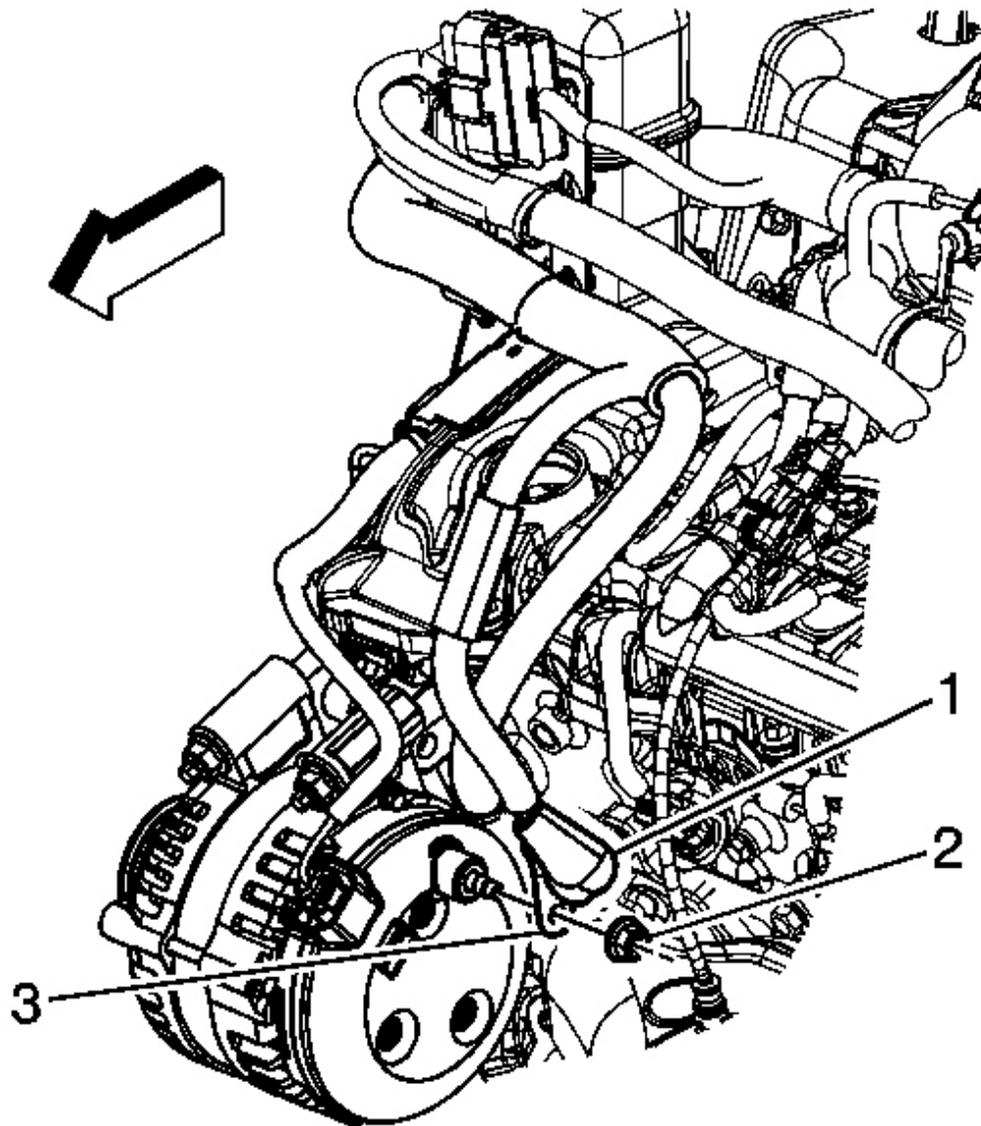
Identifying Power Steering Reservoir Inlet Hose Clip & Hose Clip Bracket
